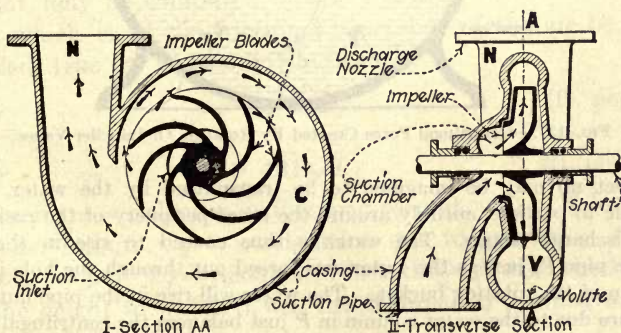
Single-Stage, Single-Suction Volute Centrifugal Pump.
